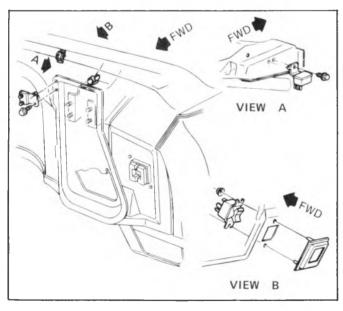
D-33--Power Window Switch, Relay and Breaker Assembly
